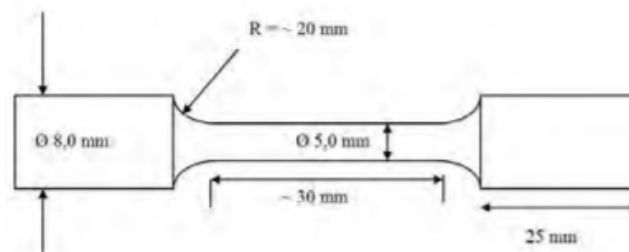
Illustration of the dimensions for the tensile test specimens.
